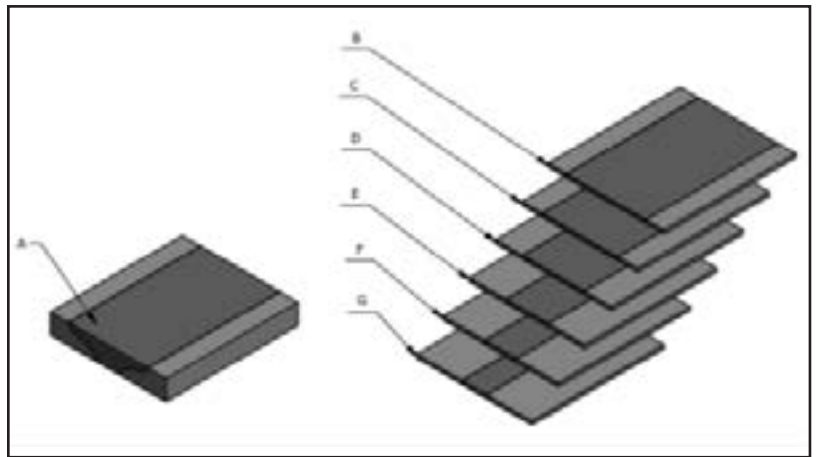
Schematic preparation of successive layers of the weld surface for macroscopic metallographic tests [8]
